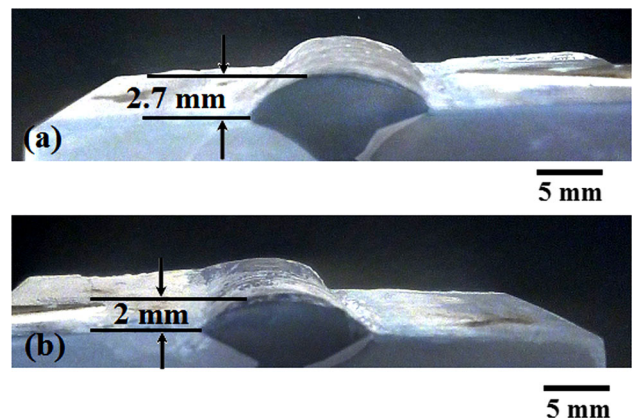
Macrographs from the cross section of the welds (a) SMA-NiCrMo sample, (b) GTA-NiCrMo sample.
